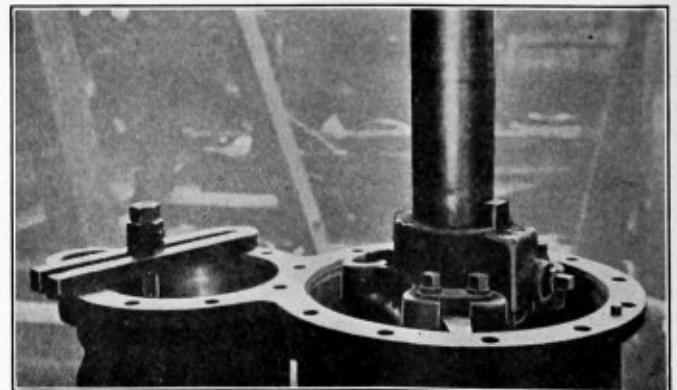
Adjustable Head Used in Boring Air Compressor Cylinders
